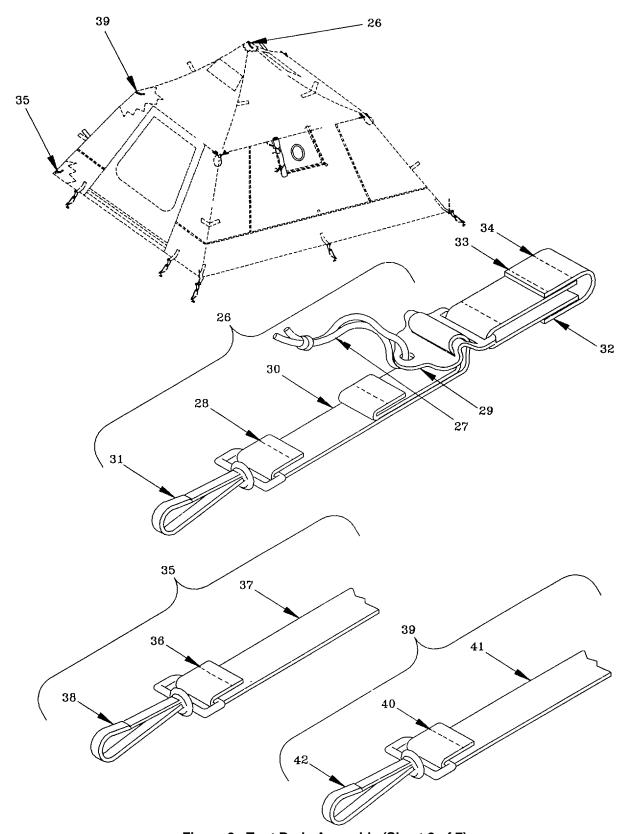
Tent Body Assembly (Sheet 2 of 7)
